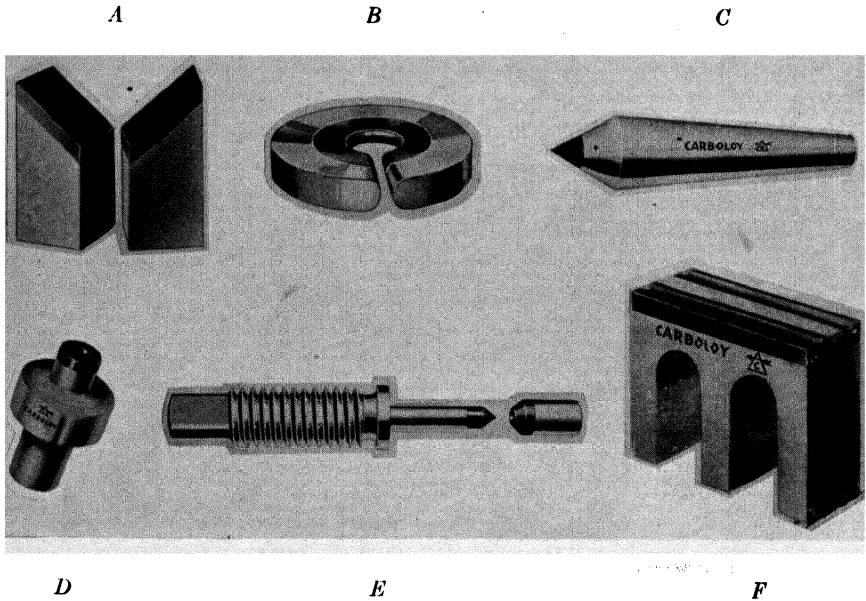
Wear-resistant parts with hard metal facings: *A*, box tool blocks; *B*, textile guide; *C*, lathe and grinder center; *D*, coating die; *E*, hydraulic valve stem and seat; and *F*, wire-coiling guide (courtesy of Carboloy Co., Inc.).
